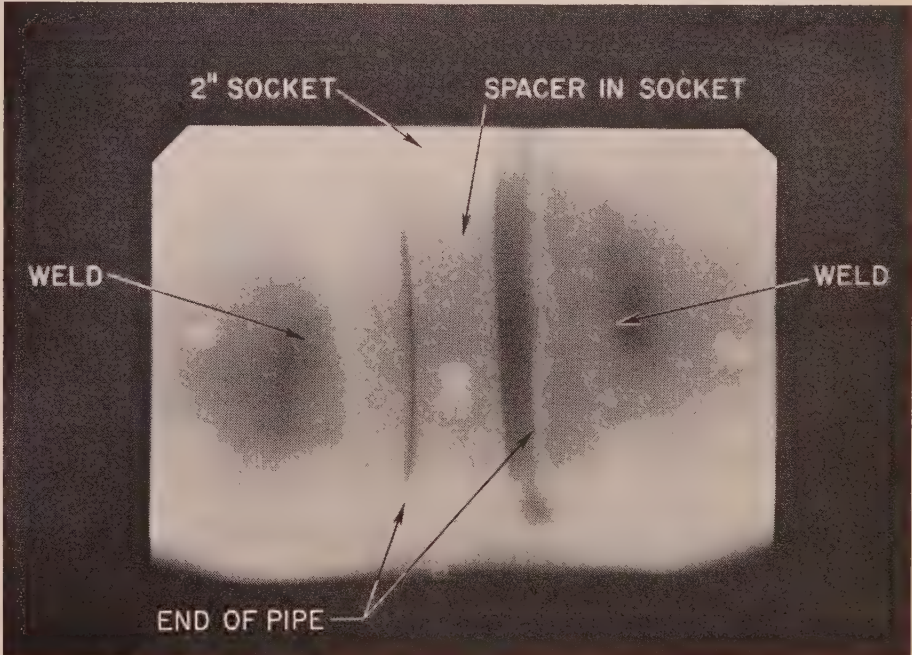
Photograph of two-in. socket weld made with isotope Iridium 192.
